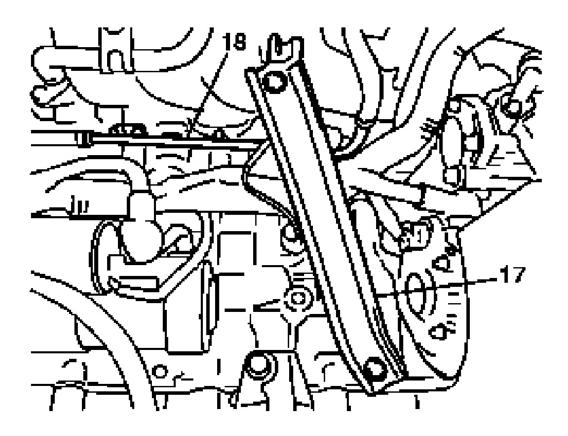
Removing Intake Manifold Rear Stiffener Courtesy of SUZUKI OF AMERICA CORP.
